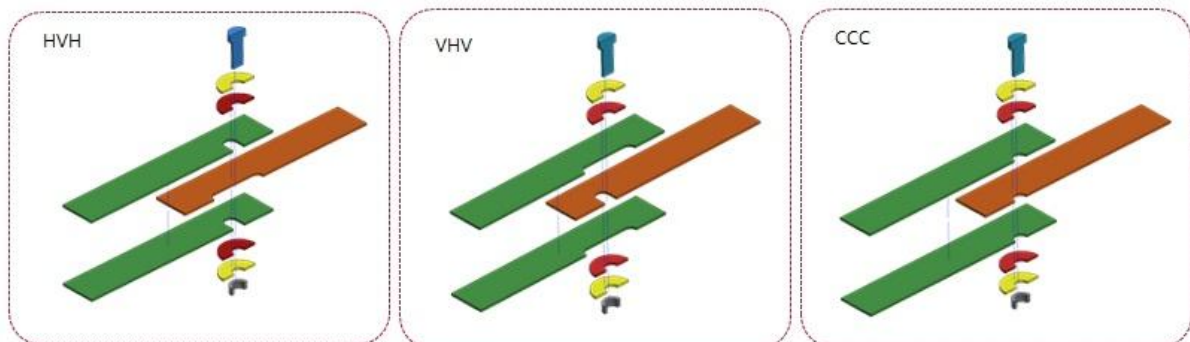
3D Models of Different Connection Layouts and Test Samples after Modification (with one bolt and two contact surfaces) [1]
